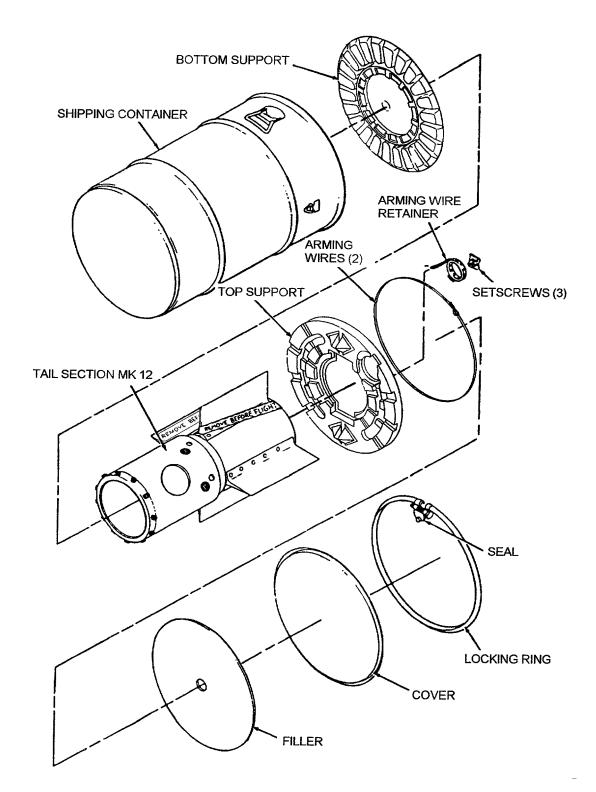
A. Flight Gear Kit Mk 166 Unpackaging
